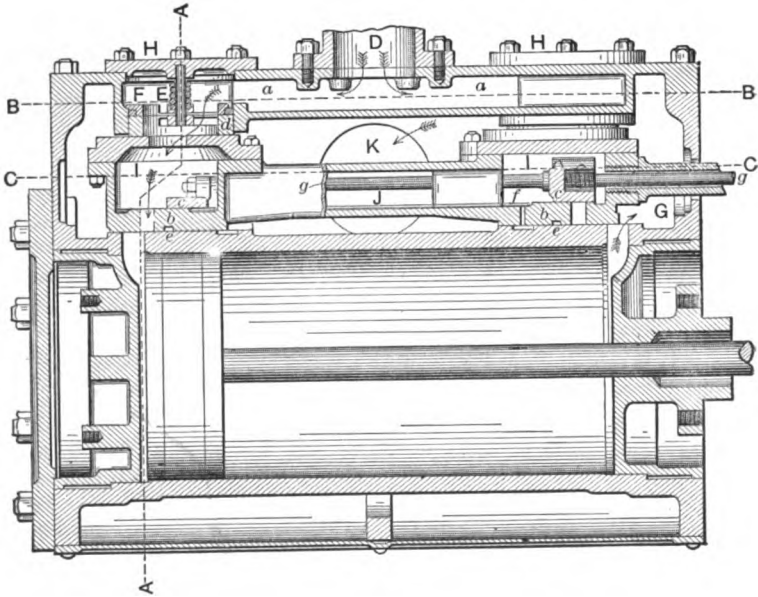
Buckeye Engine. Section through Valve and Cylinder.
